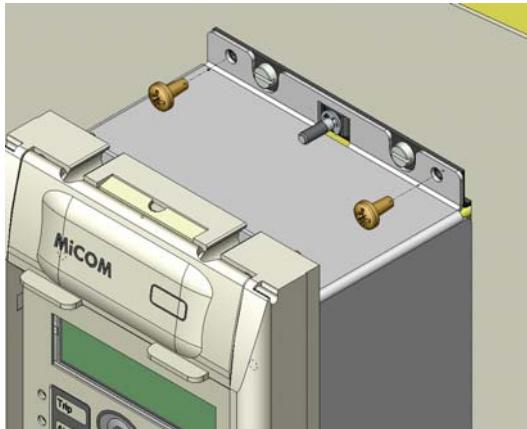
To remove P120R open top & bottom flaps and remove 4 fixing screws shown below, leaving mating collar in place (retain screws).
